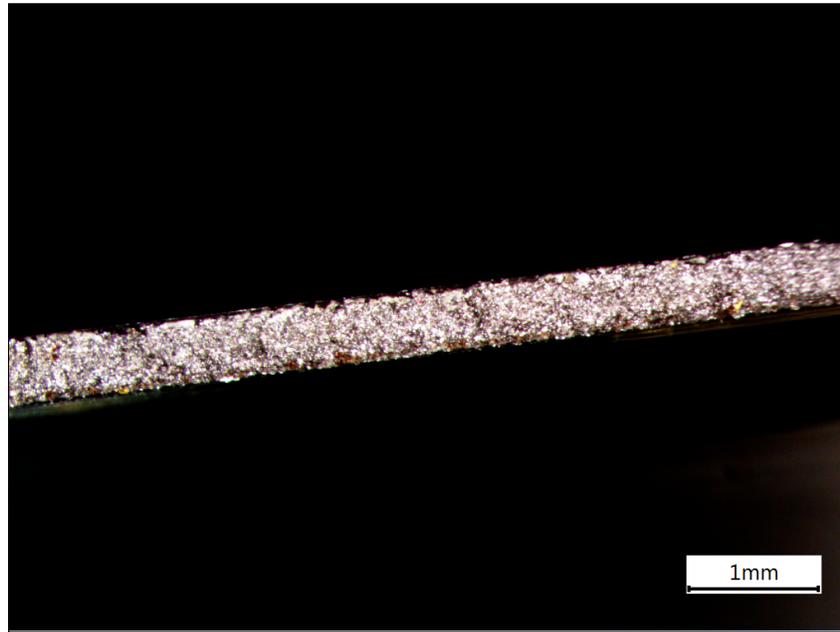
Image of fracture surface from optical stereo microscope
